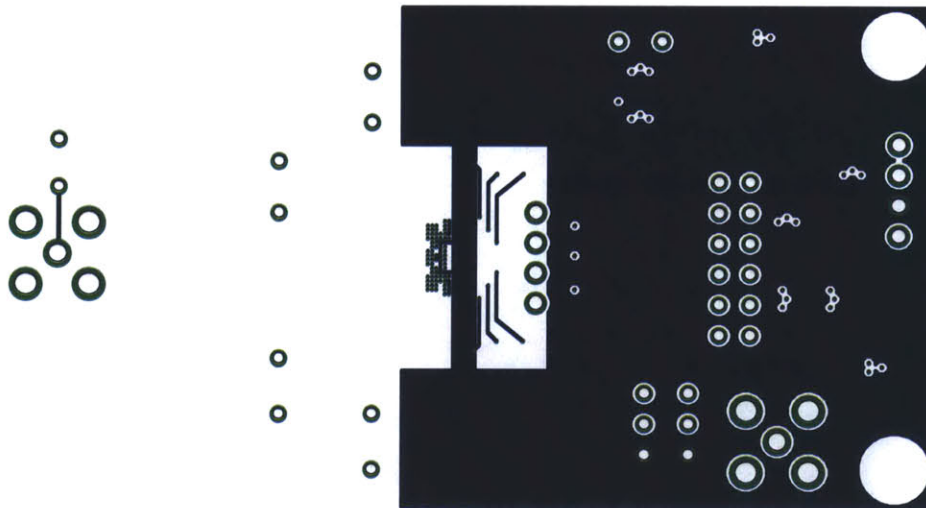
The Layer 2 PCB Layout of the Switched-Capacitor Rectifier IC Prototype.
